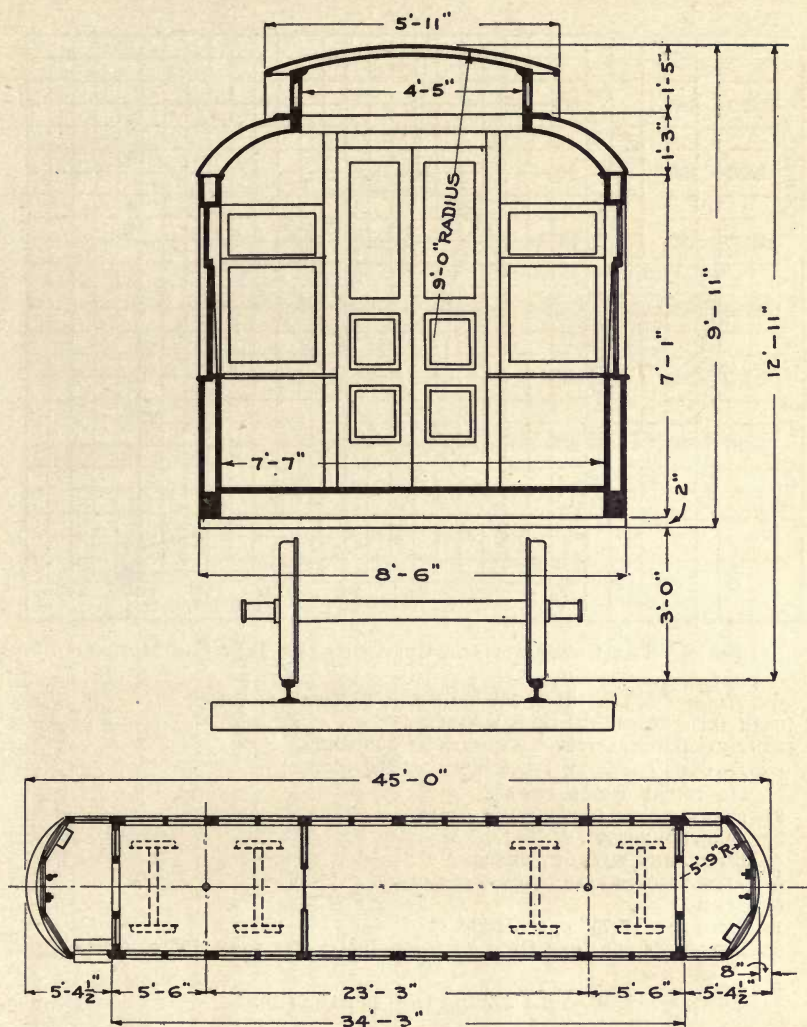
PLAN AND CROSS SECTION OF THE ELECTRIC RAILWAY TEST CAR.
